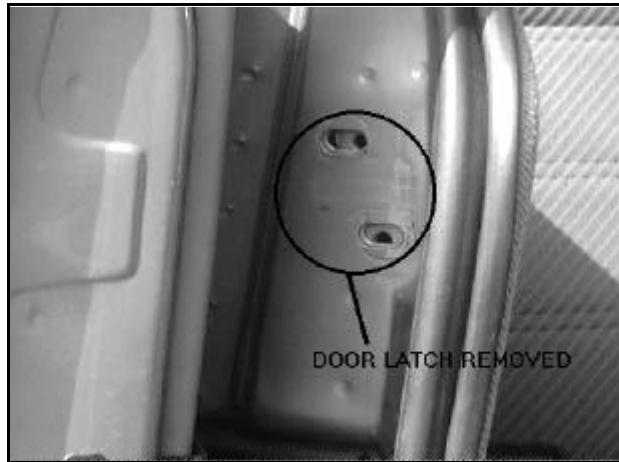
DOOR LATCH REMOVED FROM DOOR POST
